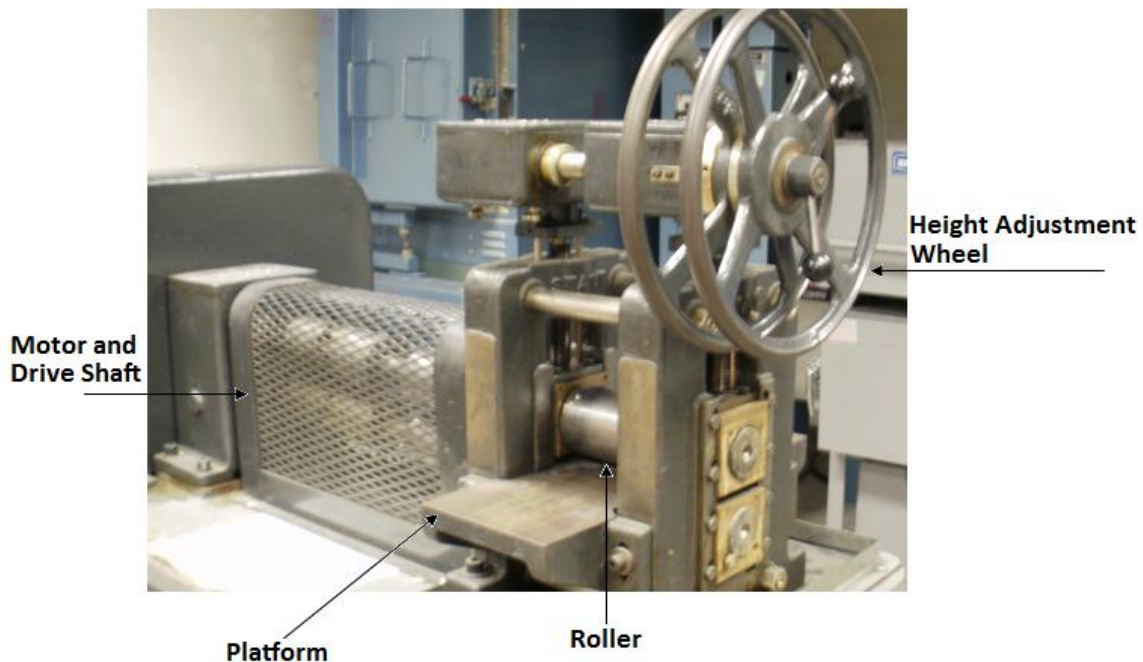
Roller press used to crush samples of GSG for use in making a GSG-Al composite
